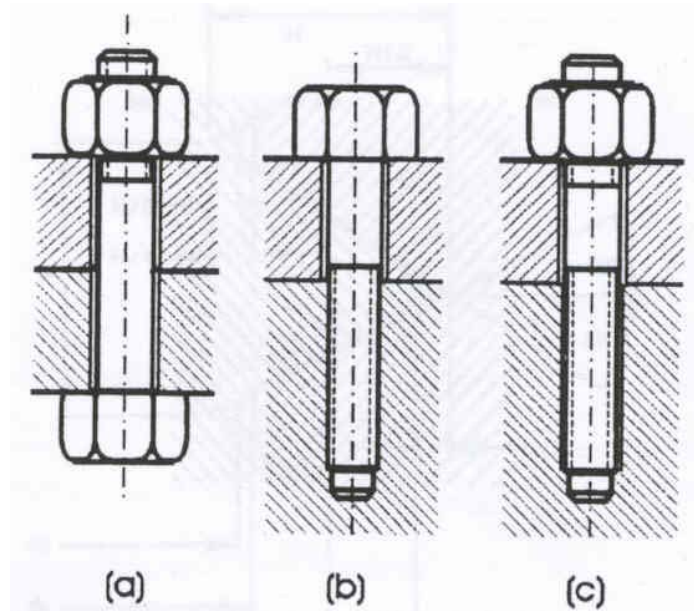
Threaded fasteners: (a) bolt with nut, (b) screw and (c) stud with nut
